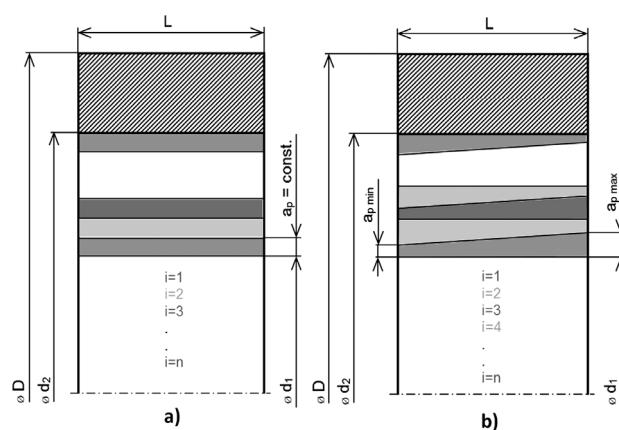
Tool paths: a) a constant depth of cut, b) a variable depth of cut ($i < 1, n >$ = number of tool paths; n = total number of tool paths; L, D, d_1 = dimensions of the workpiece; L, D, d_2 = dimensions of the semi-product before finishing)
